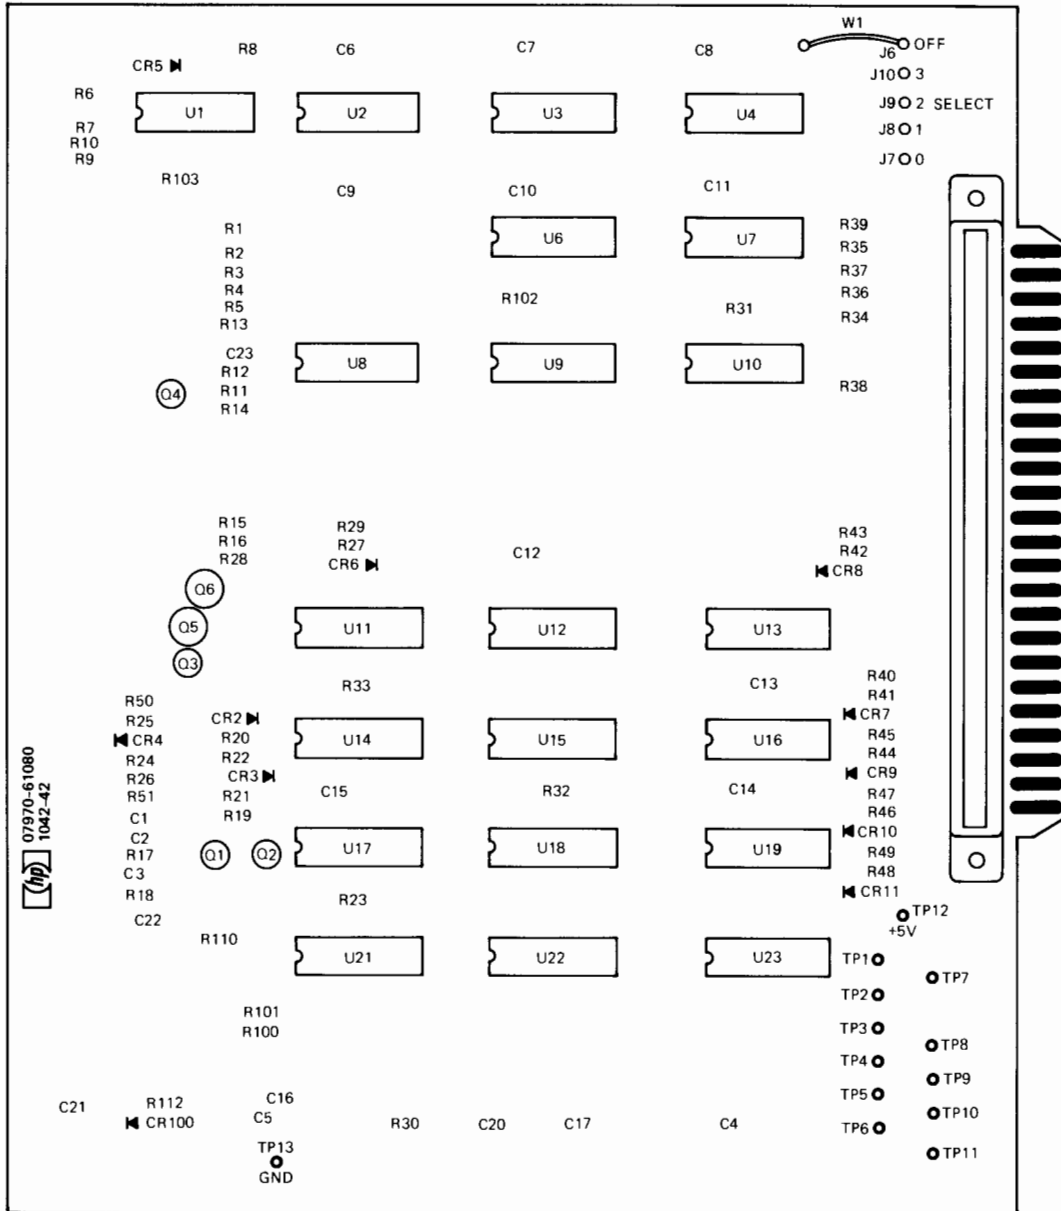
Control and Status PC Assembly A16, Parts Location Diagram
